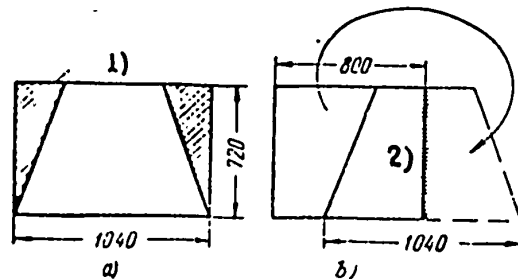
a - Stock is solid, result large triangular waste; b - Welded stock-no waste
